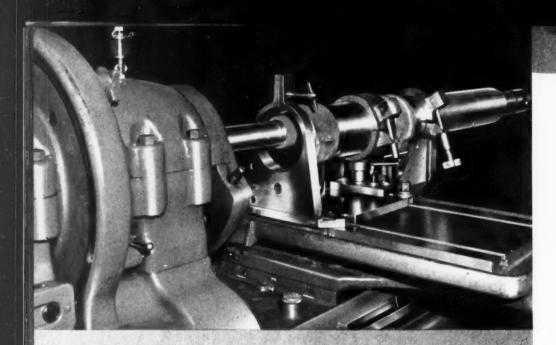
Grinding the Packing Gland Chamber in the Large End of a Main Strut with One End of the Work Firmly Gripped in a Special Fixture
